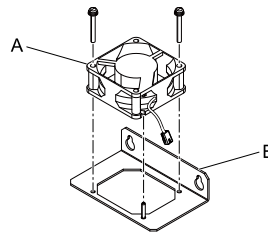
Remove the Circuit Board Cooling Fan Units
